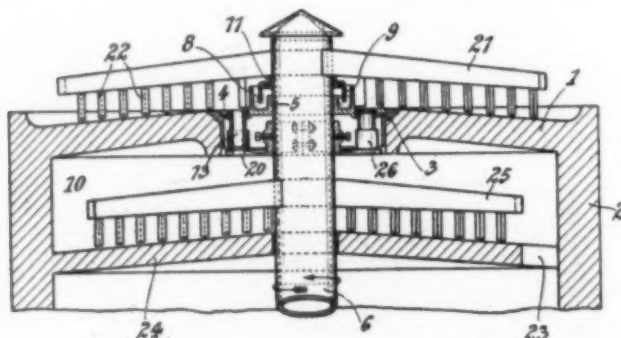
AUTOMATIC CHARGING DEVICE FOR ROASTING FURNACES
